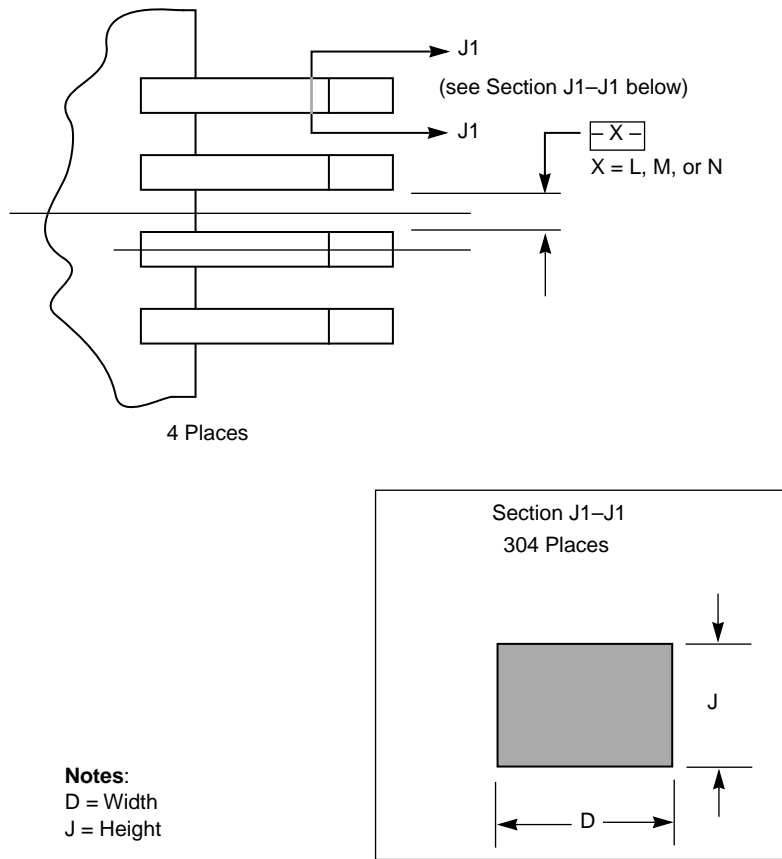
IBM C4-CQFP Mechanical Dimensions—View Y
